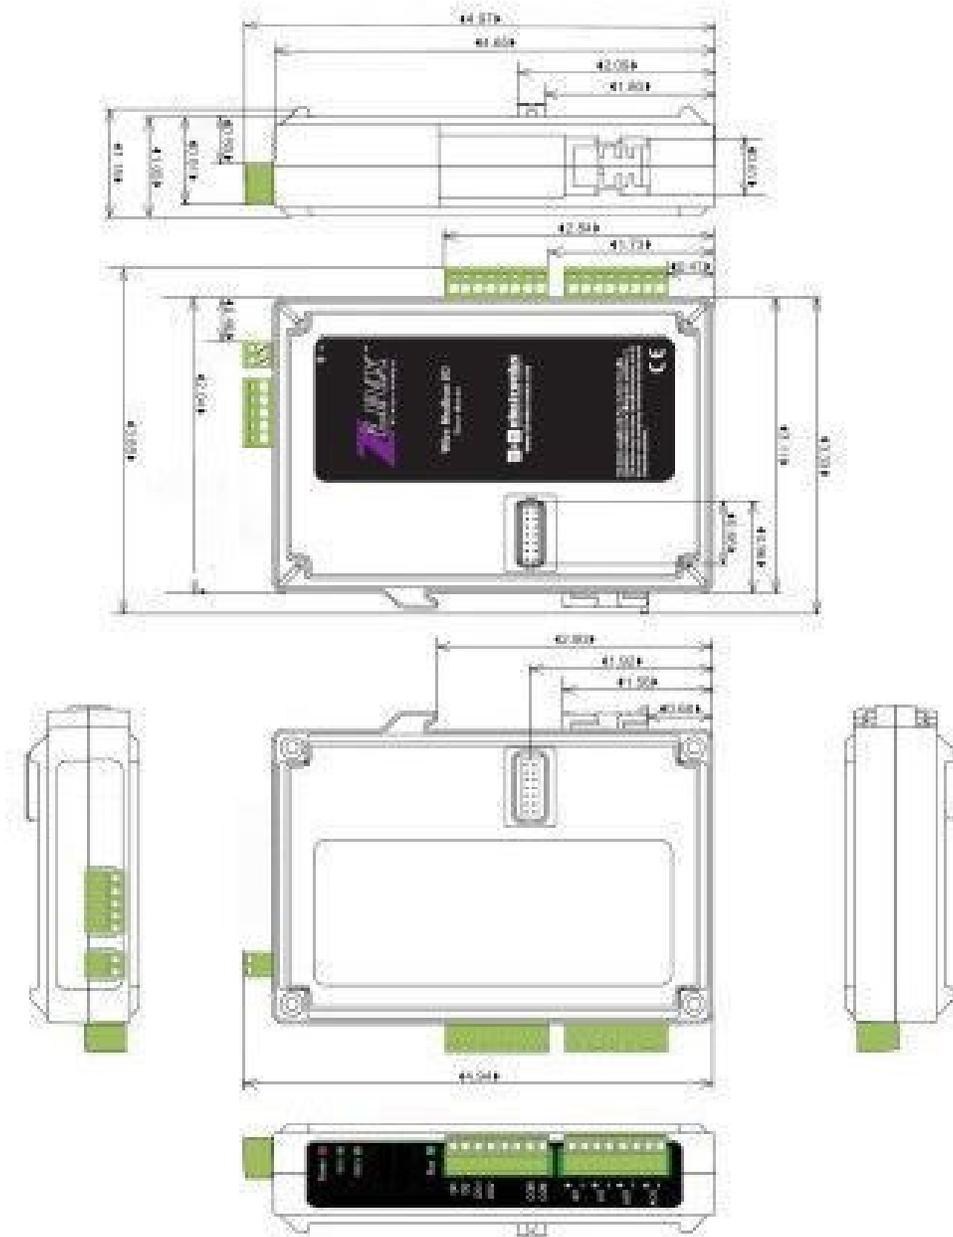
Dimensional Diagram of a Zlinx 485 Base Module
